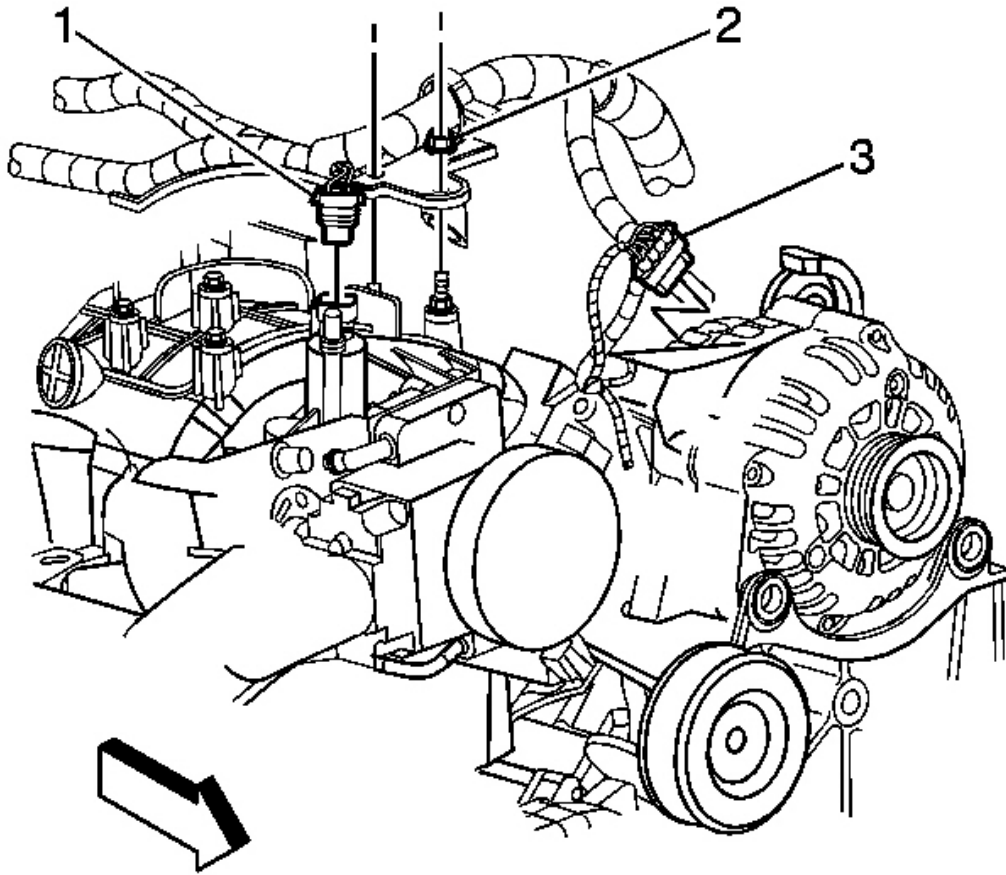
View Of EVAP Canister Purge Solenoid & Generator Electrical Connectors & Bracket Nut
